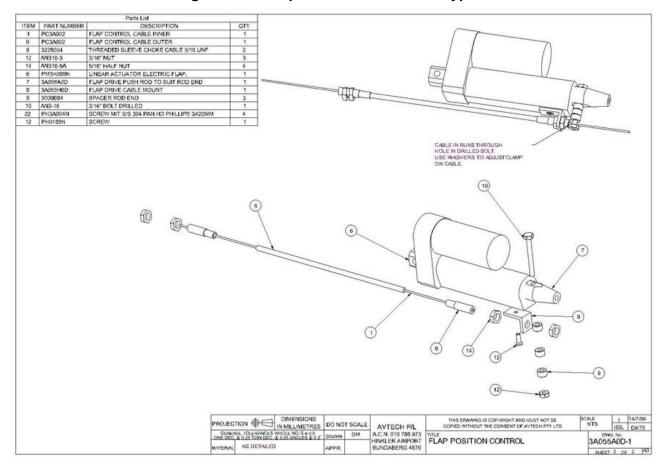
Flap Position Indicator Drive Cable Assembly (all J-Series)
